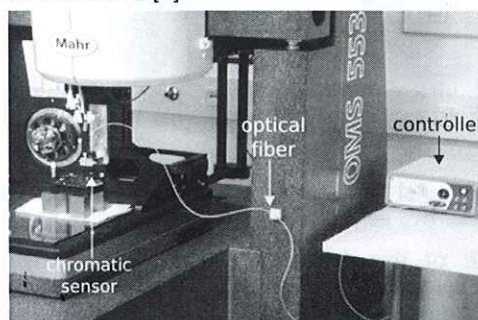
Coordinate-measuring machine with the integrated chromatic sensor, © IMR
